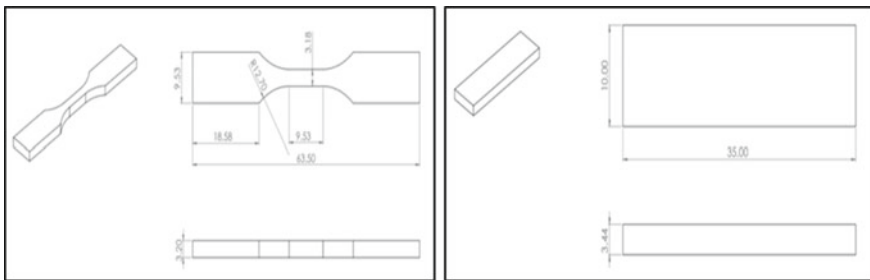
Tensile testing sample dimension ASTM D638 type V (left) and dynamic mechanical analysis (DMA) sample dimension
